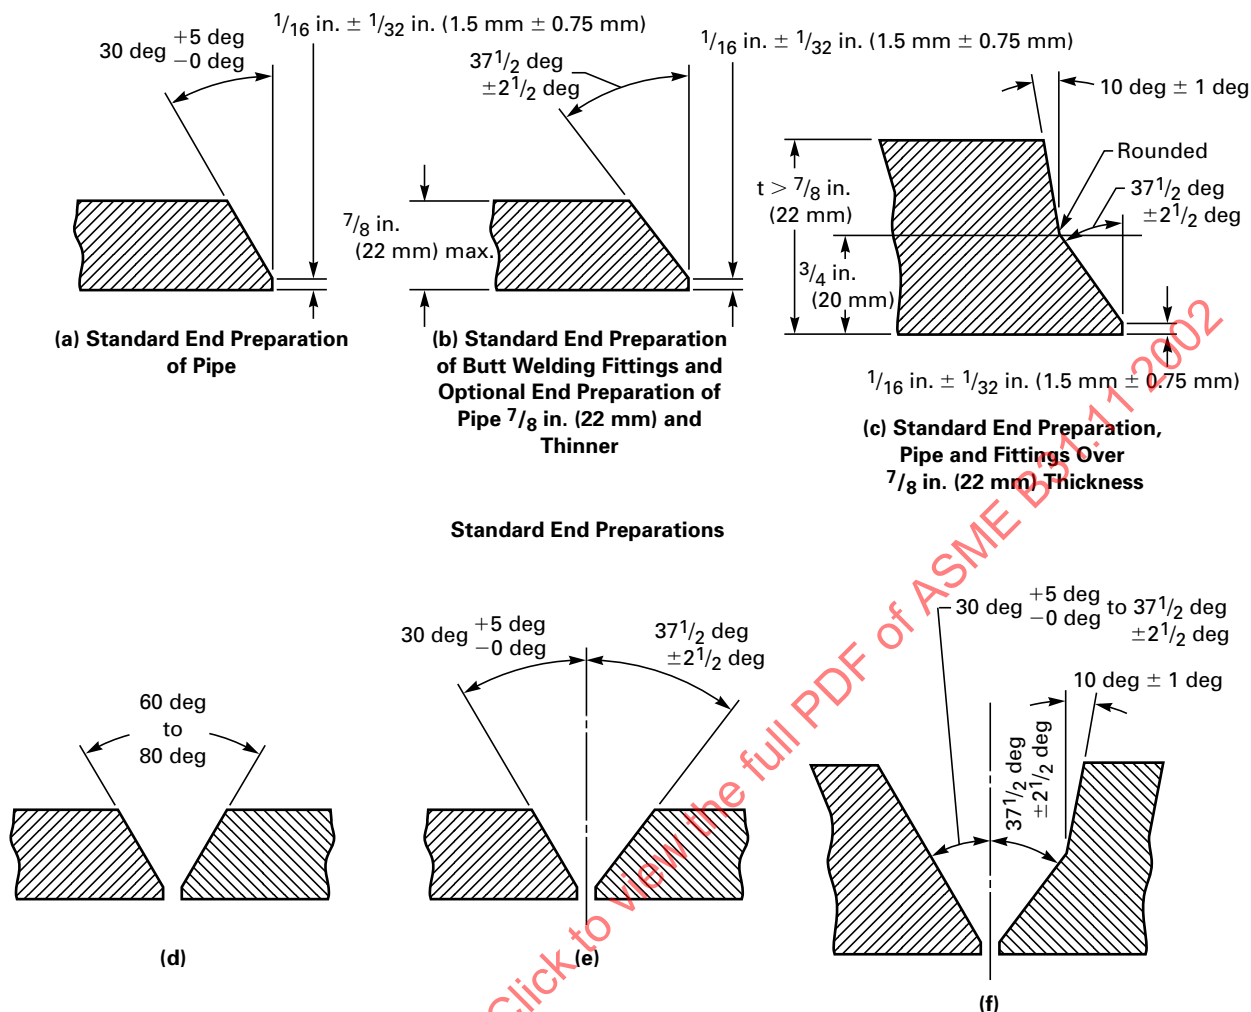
(a)-(1) Acceptable Butt Welded Joint Design for Equal Wall Thickness
